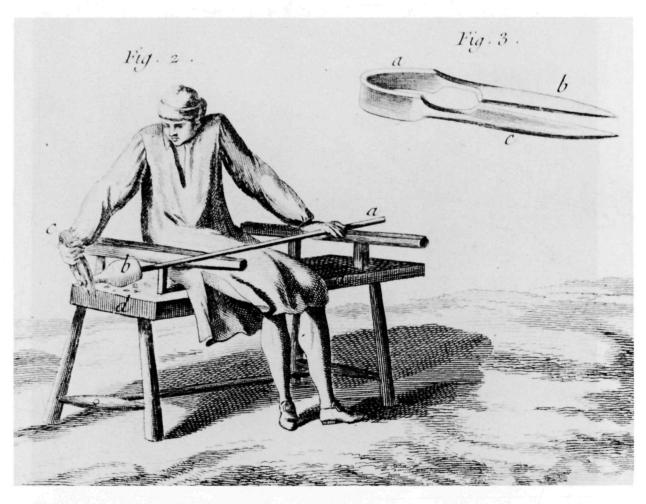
Shaping the string rim of a French liquor bottle with a metal tool called a "pince" (Diderot 1772: Pl. VI; RD-38 T).
